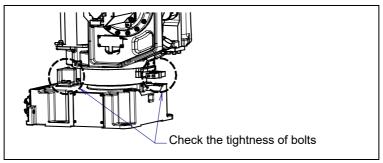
(a) Check of fixed mechanical stopper and adjustable mechanical stopper
